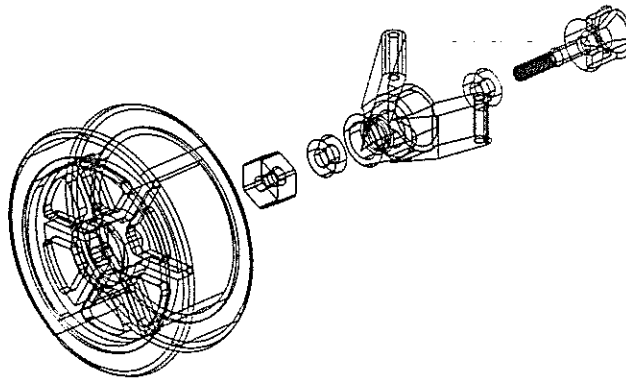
Exploded view of the rear hub and wheel subassembly
